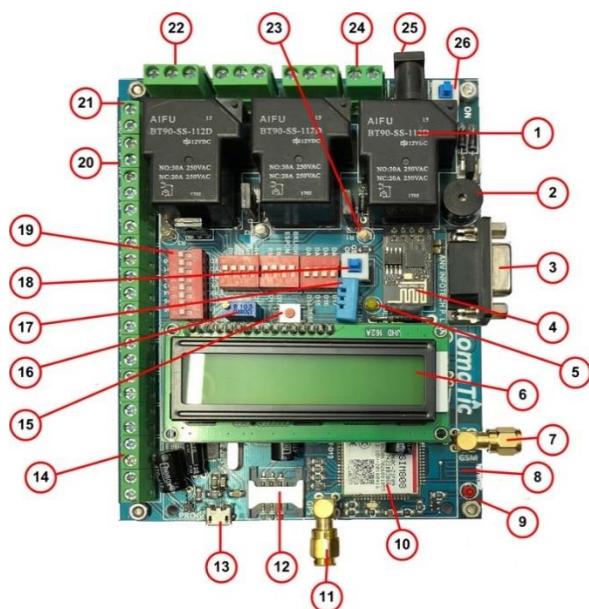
(C): Final developed IoT Development Board with Component Mounting
